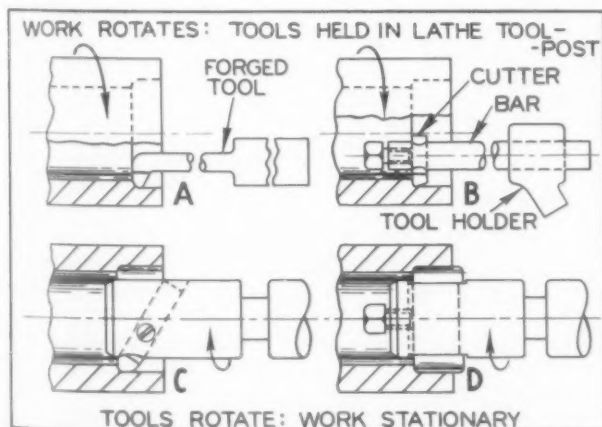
Typical plain boring tools. A and B are lathe boring tools, the one a forged tool, the other a bar with inserted bit. C and D are stub boring heads, the former taking an inserted single-point bit, the latter a 2-edged cutting blade.
